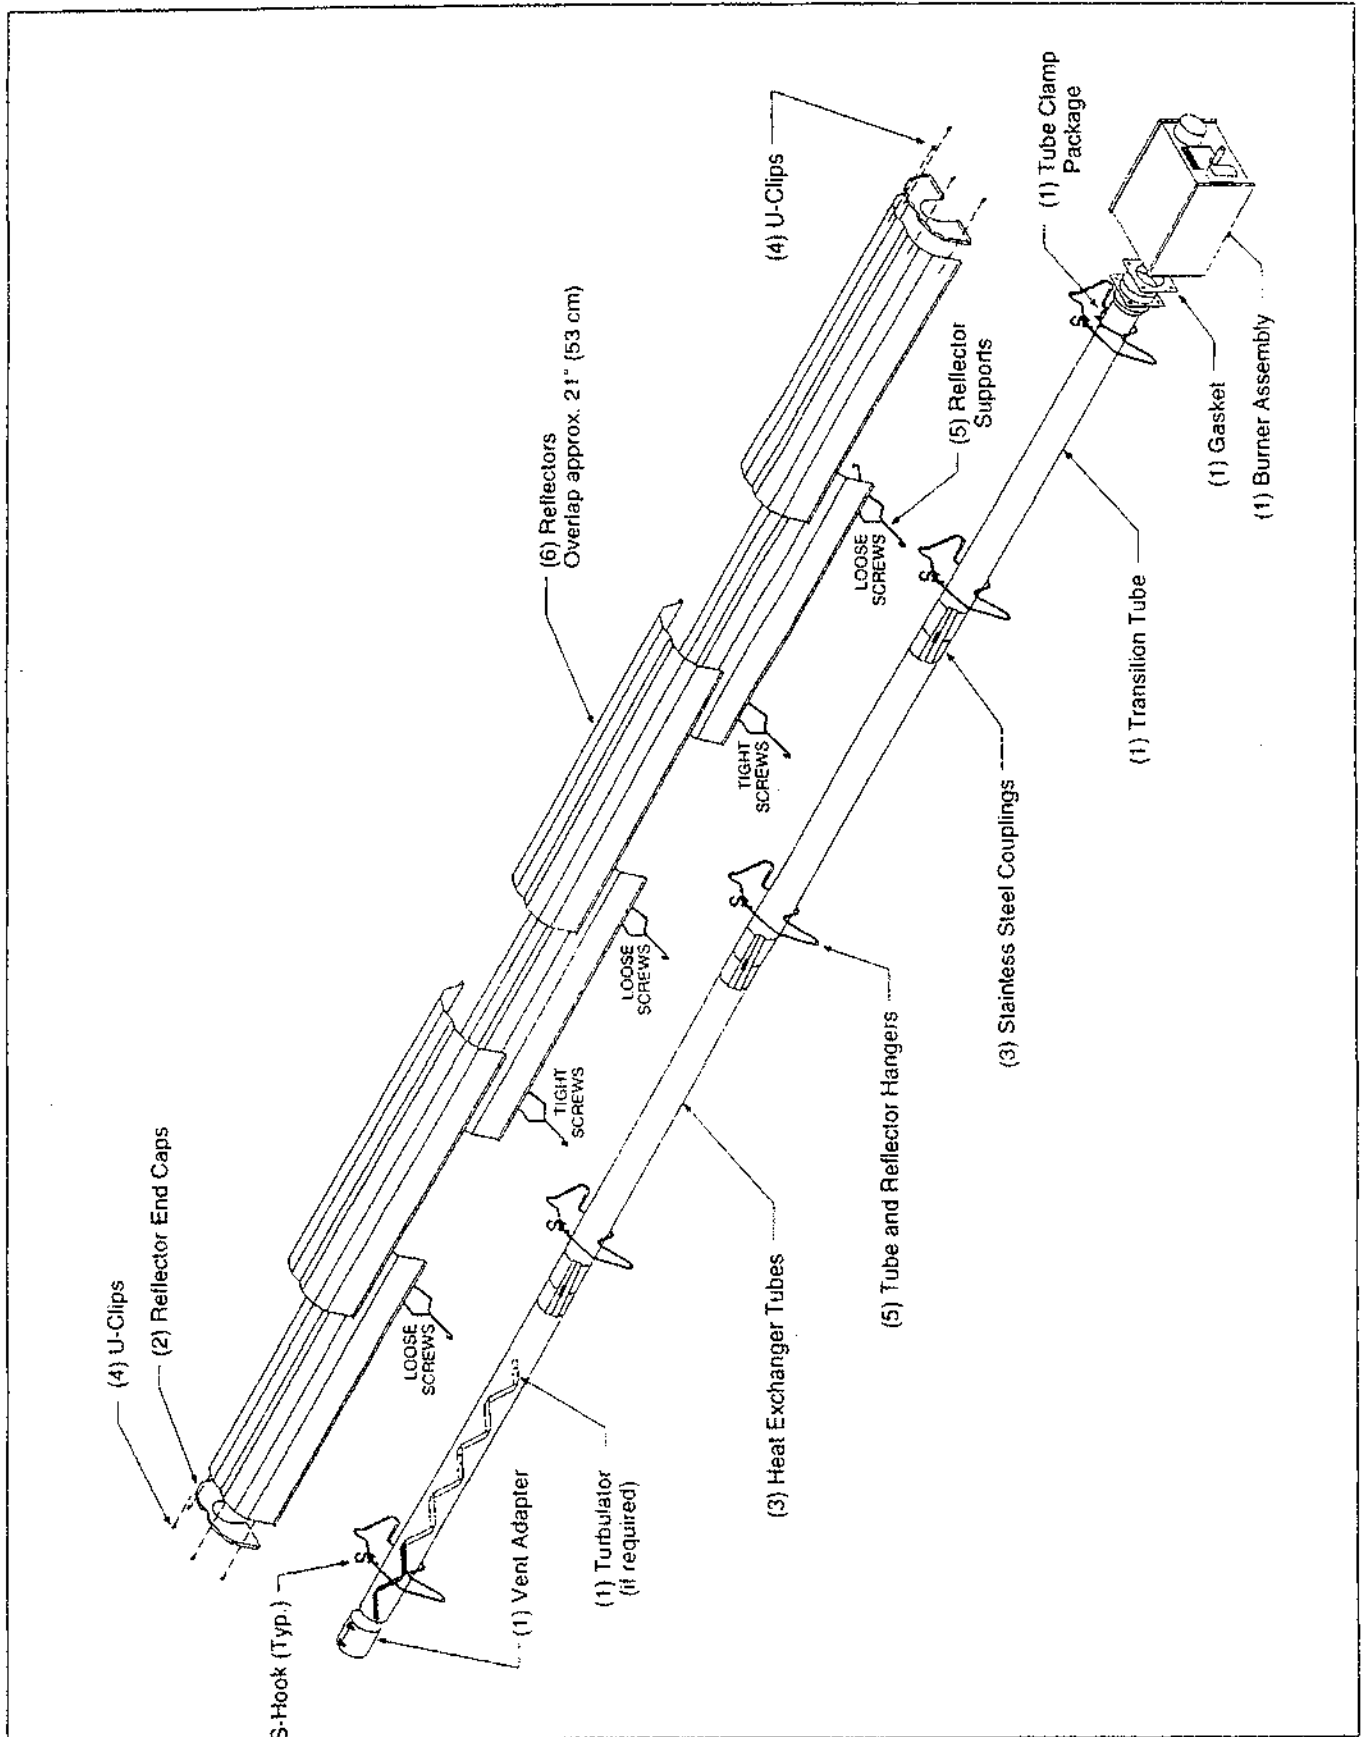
Assembly of 40 ft (12 m) Heat Exchanger System
